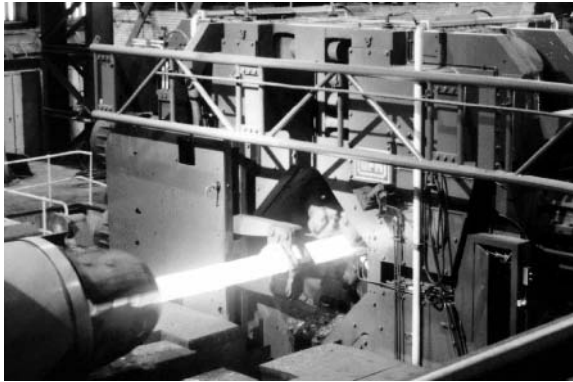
Rotary general forging machine (GFM) reducing the diameter of a round billet (courtesy Teledyne Allvac)
